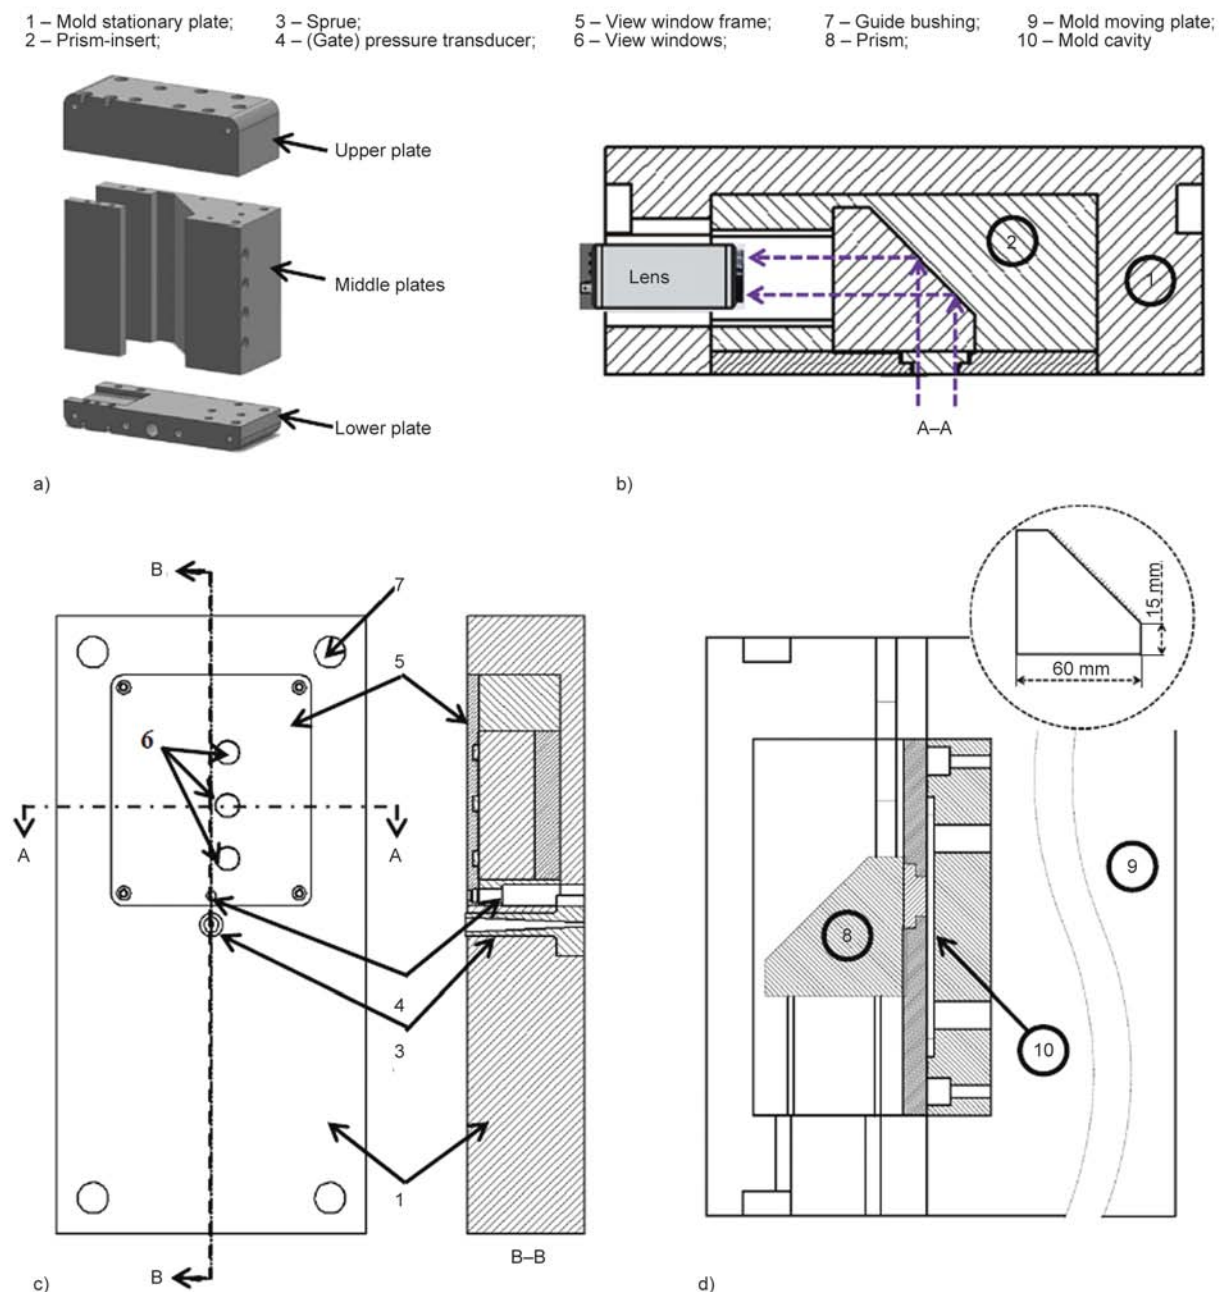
a) Prism-insert; b) top sectional view of the visualization mold stationary plate, the principle of the reflective prism, and the location of view windows; c) detailed design of the visualization mold stationary plate; d) top sectional view of the complete visualization mold
